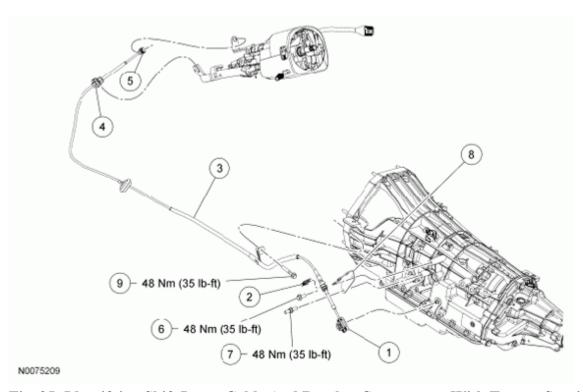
Identifying Shift Lever Cable And Bracket Components With Torque Specifications (TorqShift) Courtesy of FORD MOTOR CO.
